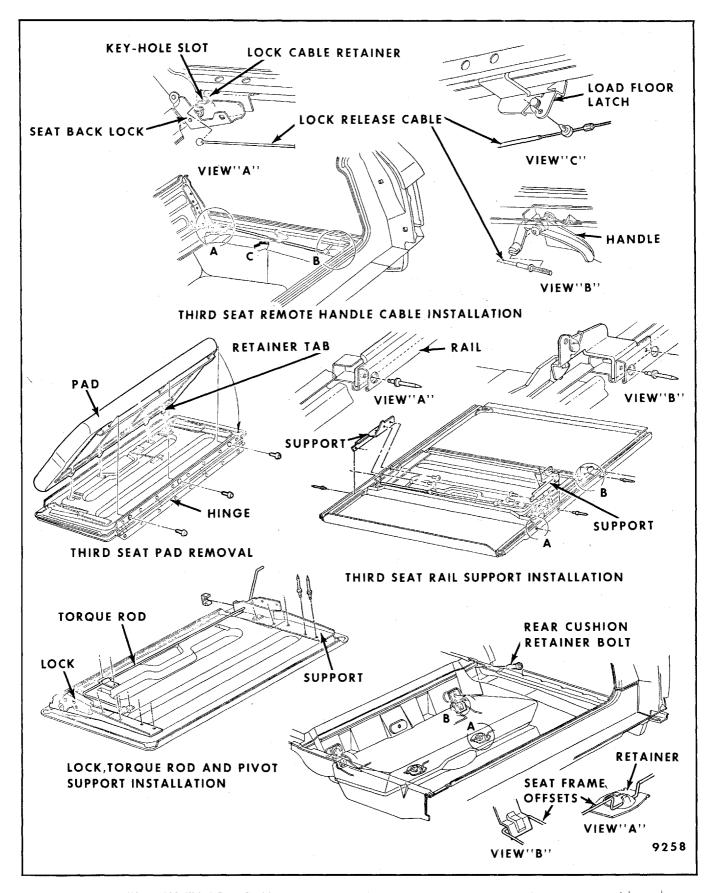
Third Seat Cushion and Back Installation - B Style Three-Seat Station Wagons
